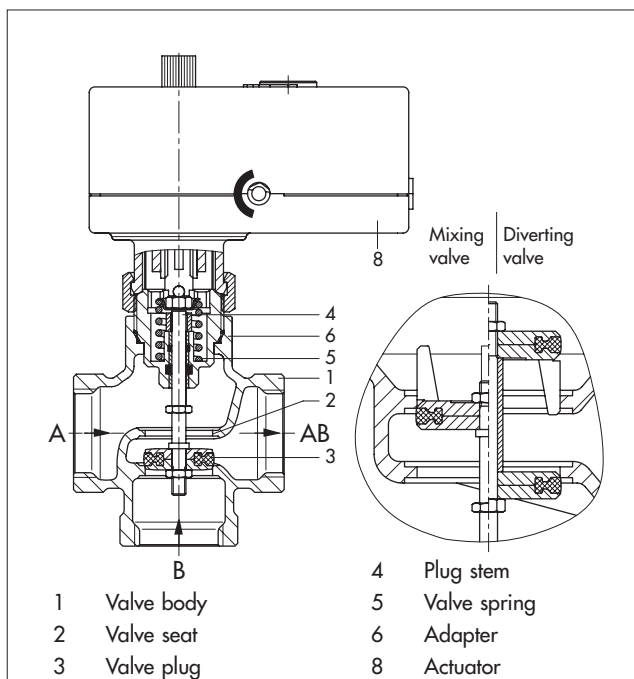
· Functional diagram of Type 3226/5757 (left) as a mixing valve (DN 15 to 25) · Plug arrangement (right) for version with male thread (mixing and diverting valve)
